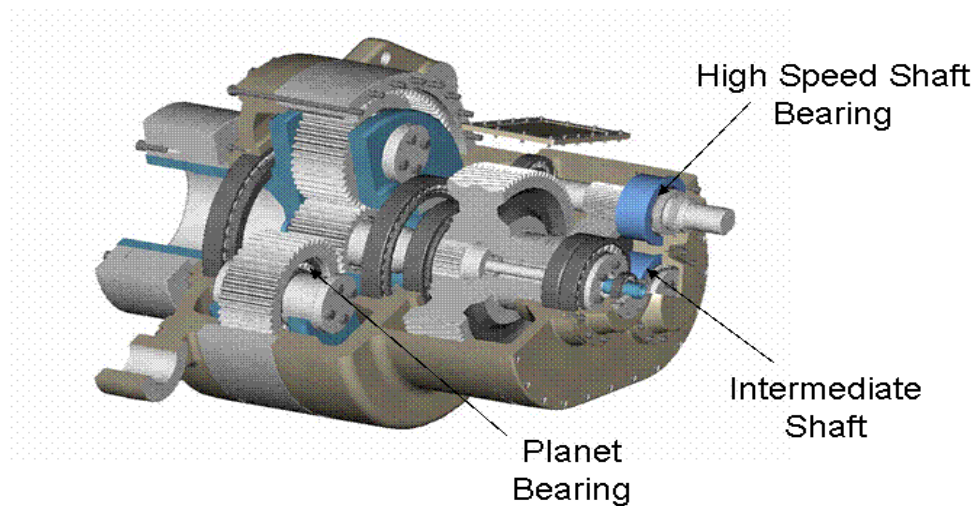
General Modified Gearbox Configuration used in Wind Turbines [6]
